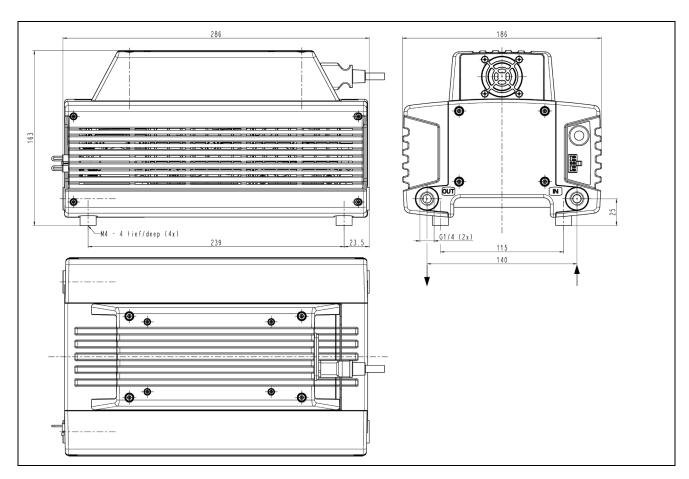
Dimensions of N 950.50 KNE-W (dimensional tolerances according to DIN ISO 2768-1, tolerance class V)
